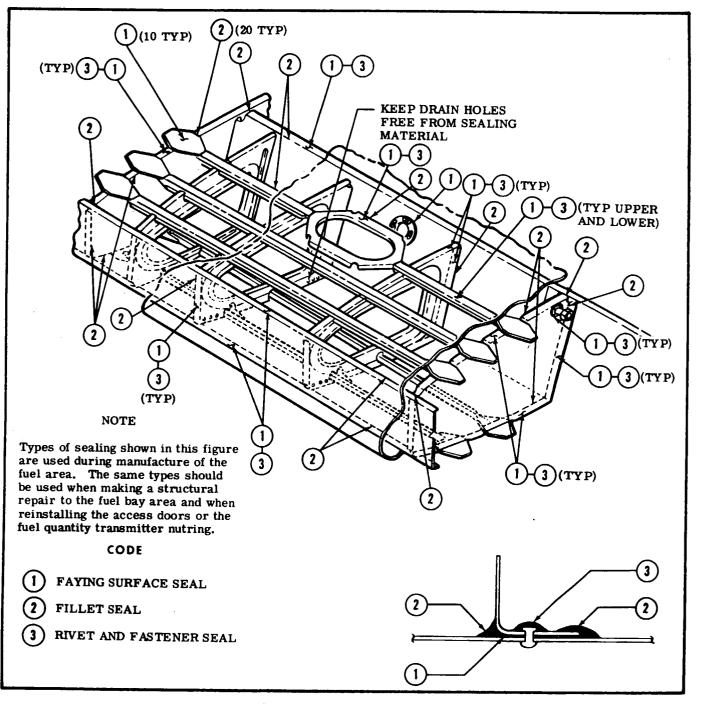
Typical Fuel Bay Sealing (Sheet 1 of 2).
